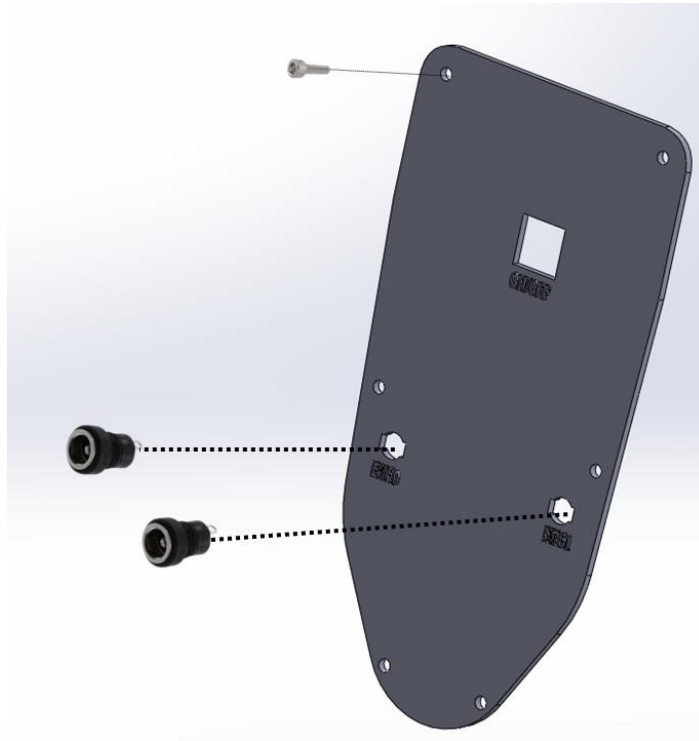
Placing the EMG Plug socket on the Frontside segment of the Upper-arm Cover
